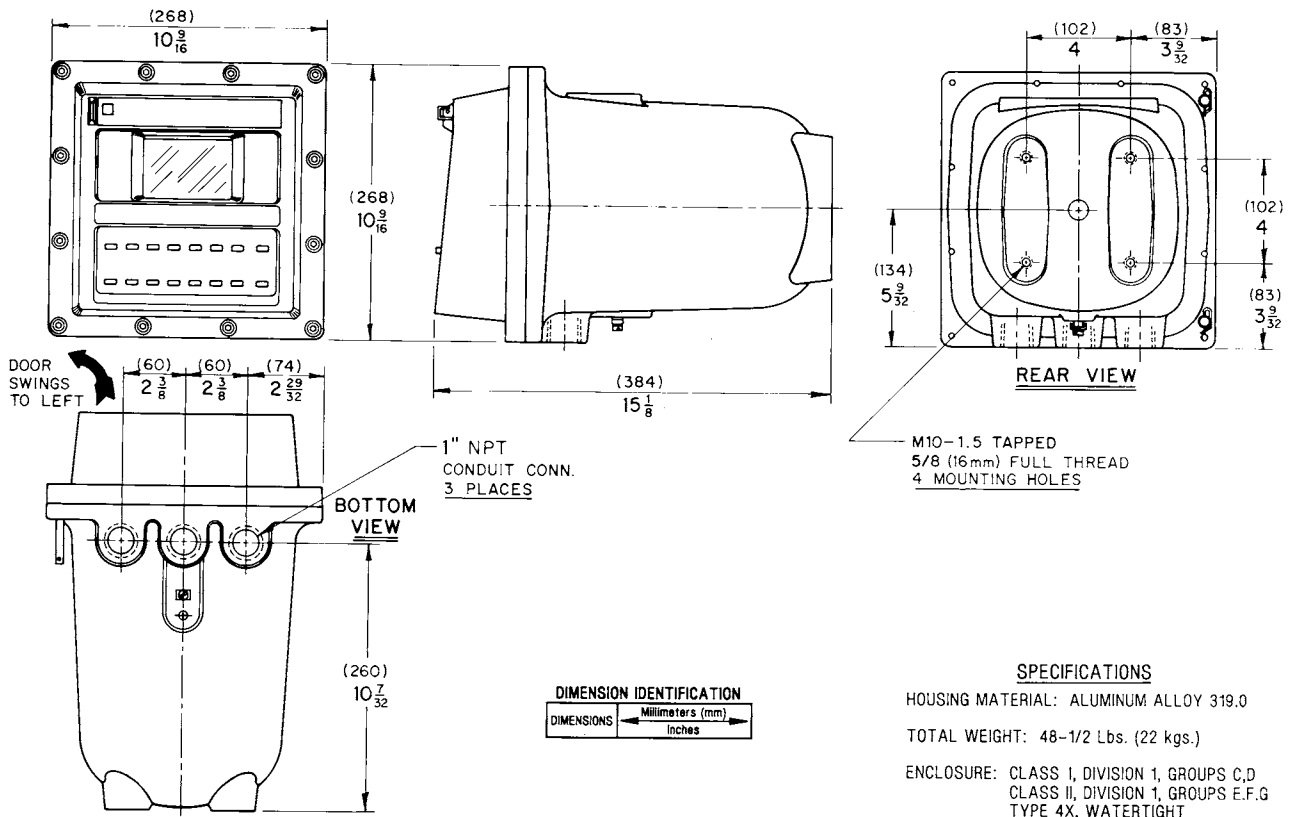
Dimensions PetroCount SMS Explosion Proof Housing
